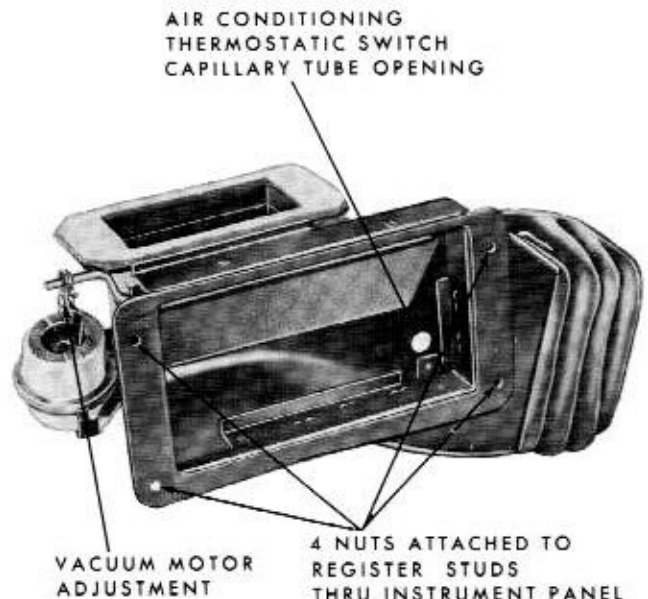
Right Instrument Panel Register and Defroster Duct Vacuum Motor Adjustment—(60L-8824)
